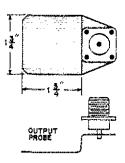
The output-coupling probe is a piace of copper sheet, bent as shown and soldered to the center pin of a unf coaxial connector. The fishing-string-and-shaft method is used to adjust the probe position relative to the plate line.
